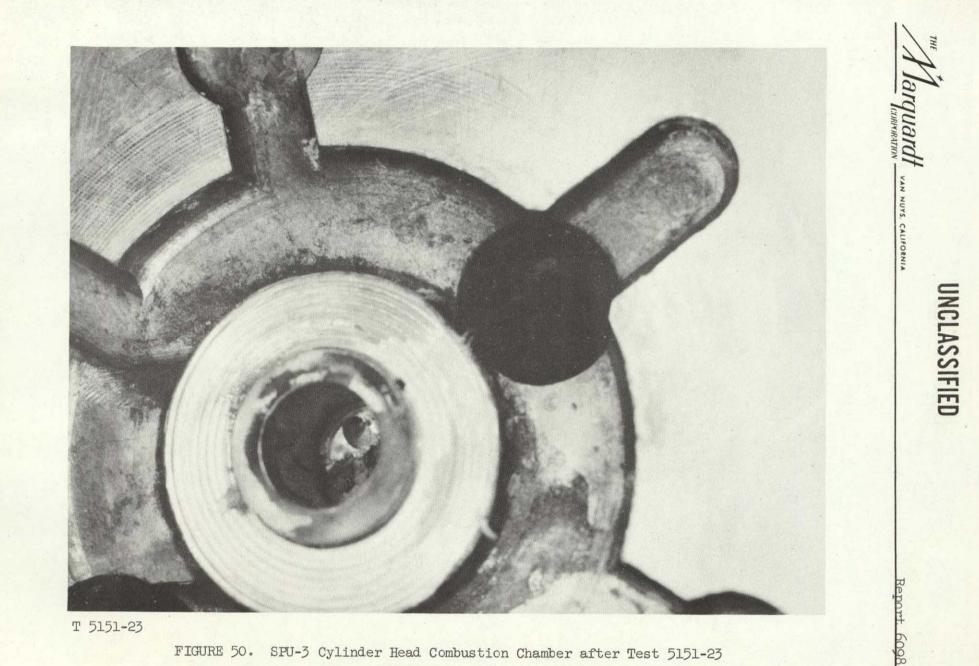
SPU-3 Cylinder Head Combustion Chamber after Test 5151-23
